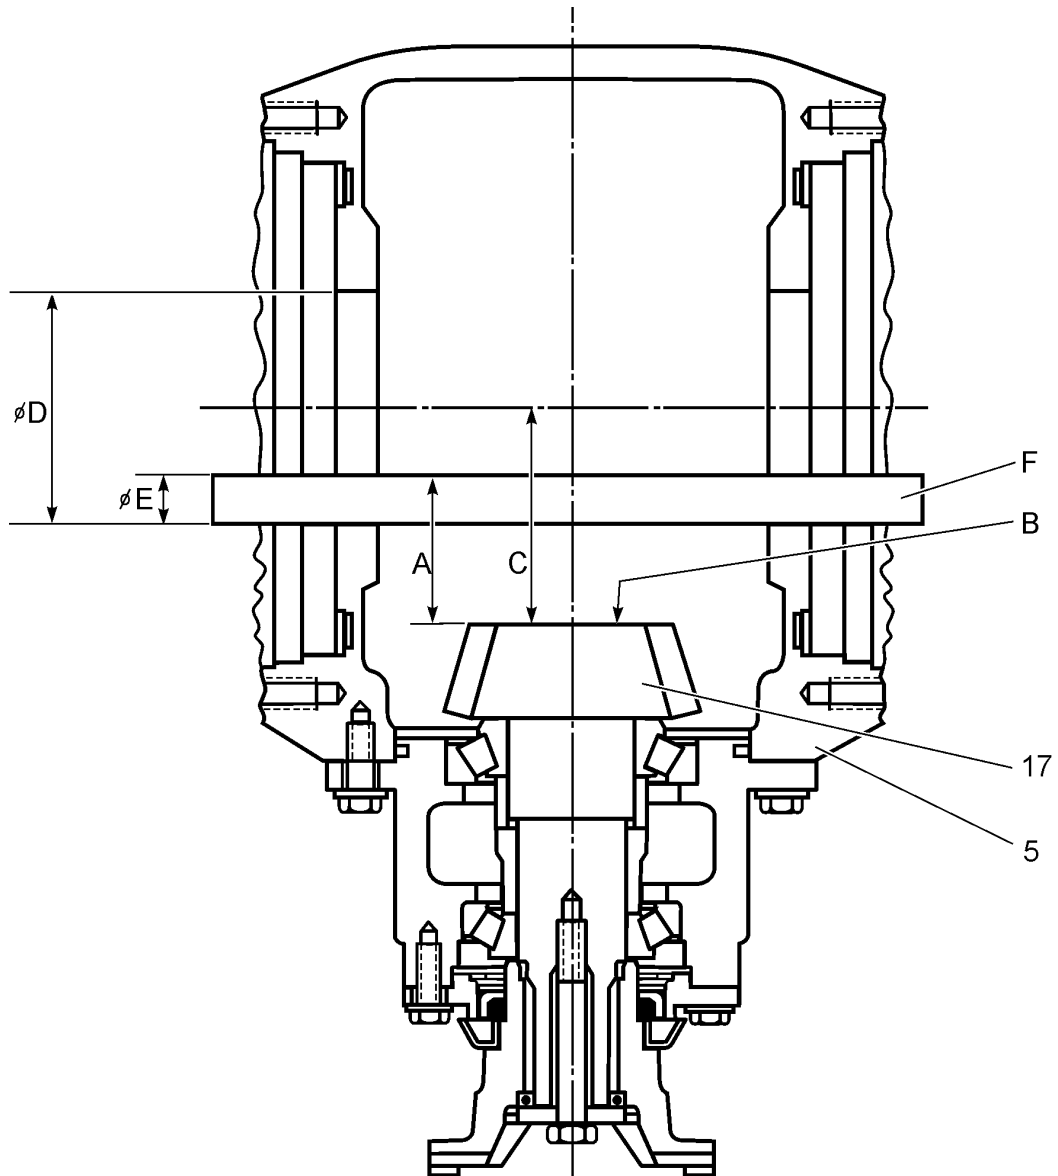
D.49. Dimension (C) Obtaining (Front Axle)
